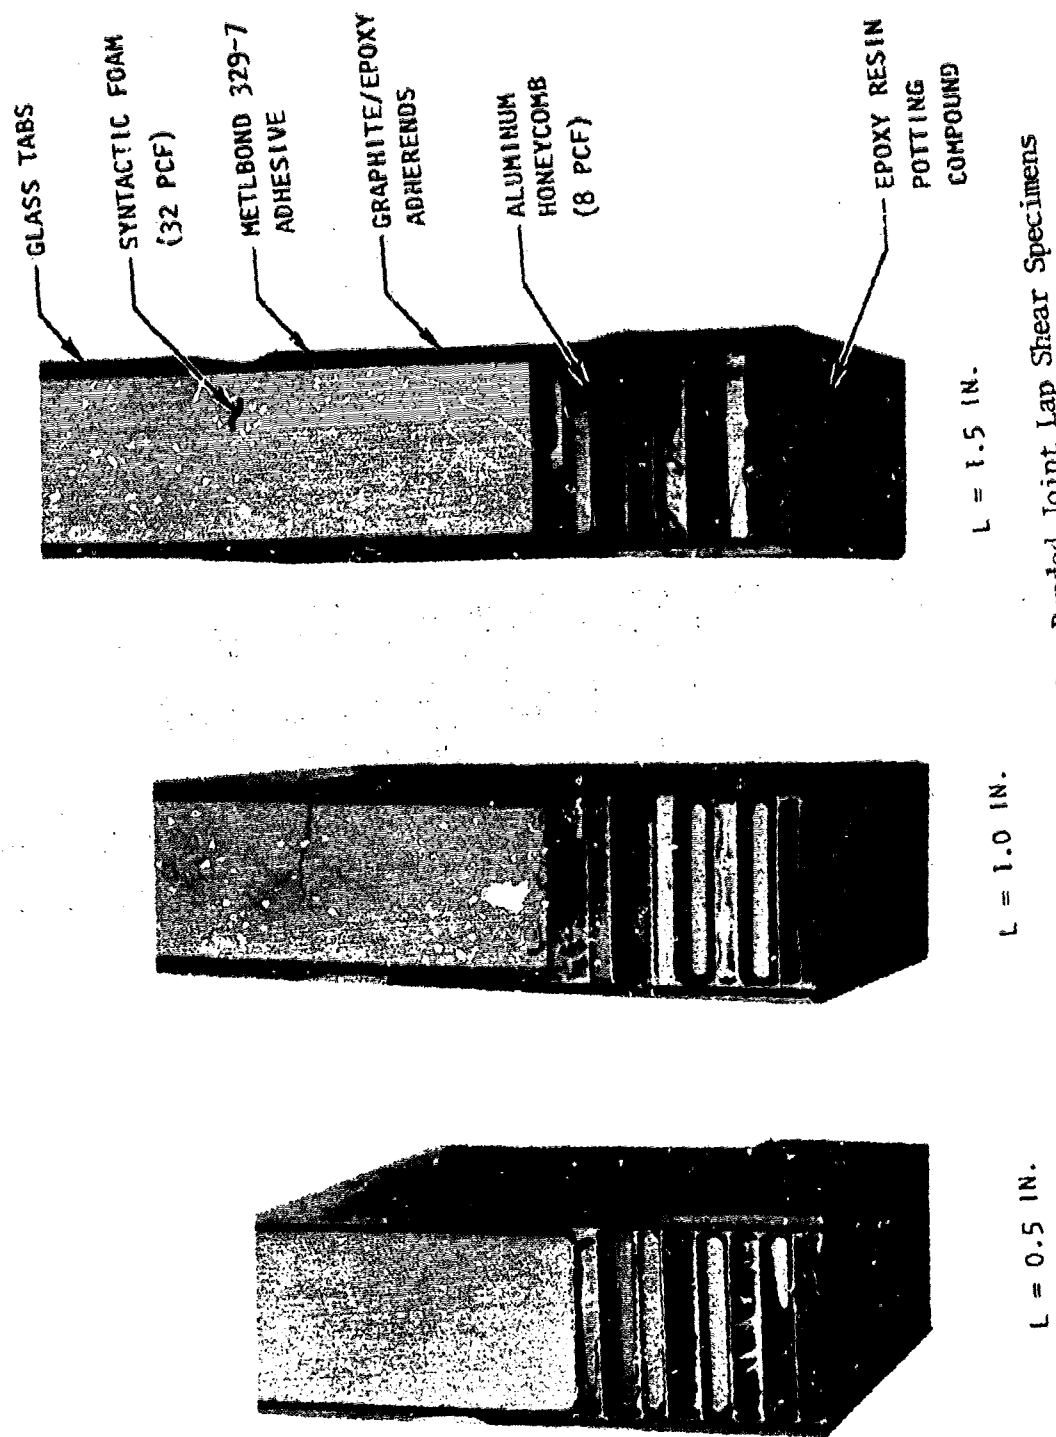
Graphite-to-Graphite Sandwich Compression Bonded Joint Lap Shear Specimens
